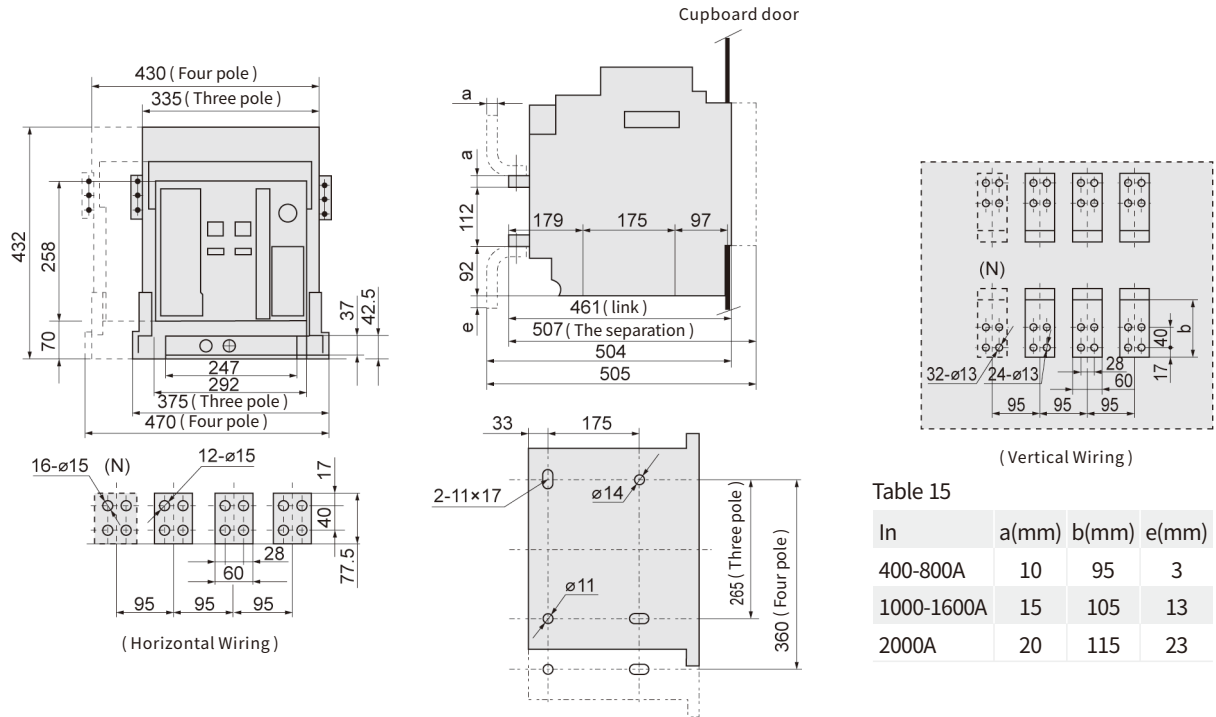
Outline and installation dimensions of drawout type circuit breaker (EKA1-2000, 2000/4)
